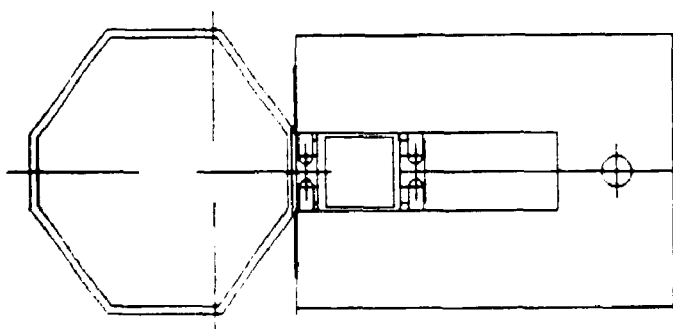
Assembly drawing of the magnetic extraction septum and the beampipes of the ring and the extraction line.
